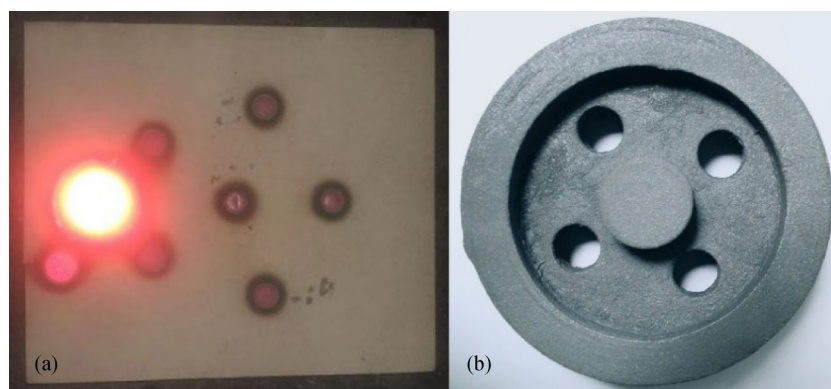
Pouring of pulley castings: (a) Casting process and (b) casted blank.
